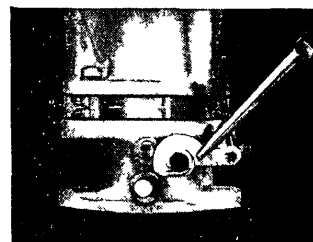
Install choke connector rod and throttle shaft. Place dog in cast iron shaft. Check rod and dog for wear
